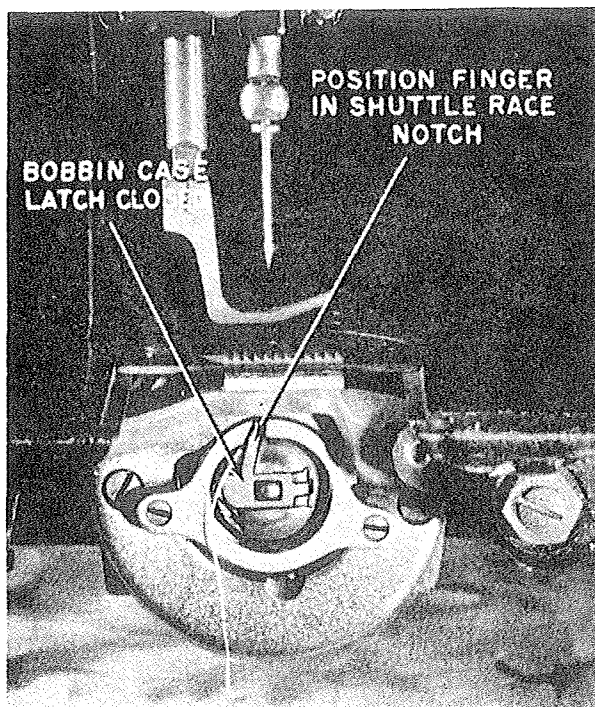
Bobbin case in shuttle race, with bobbin thread ready to be picked up by needle thread.
